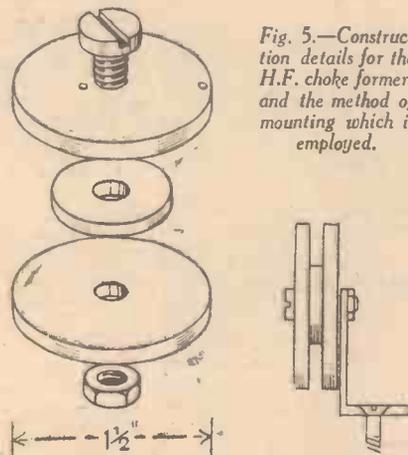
Construction details for the H.F. choke former, and the method of mounting which is employed.
